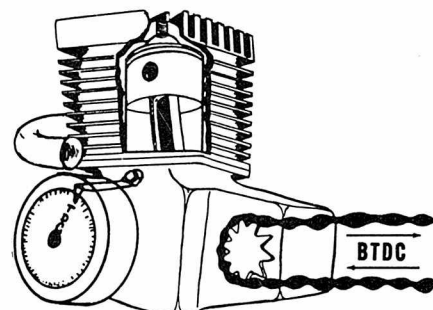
View of typical degree wheel installation for checking ignition timing. Degree wheel can also be used for checking rotary valve timing and piston port opening.
